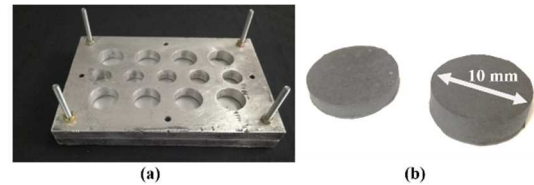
Sensing element fabrication (a) Three-layer mould used for the fabrication (b) Fabricated sensing pills
